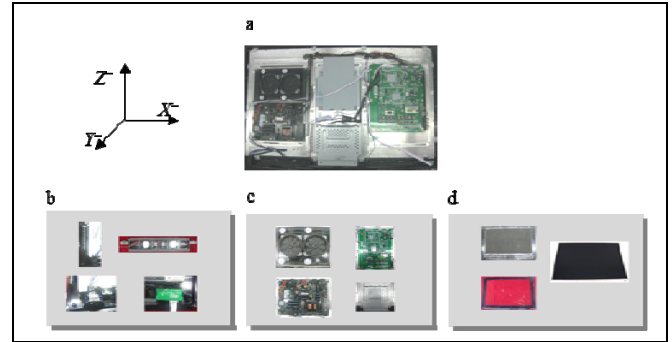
The front assembly part of LCD television (a) Front assembly part, (b) Components J,K,L,M (c) Components N,O,P,Q (d) Components R,S,T
